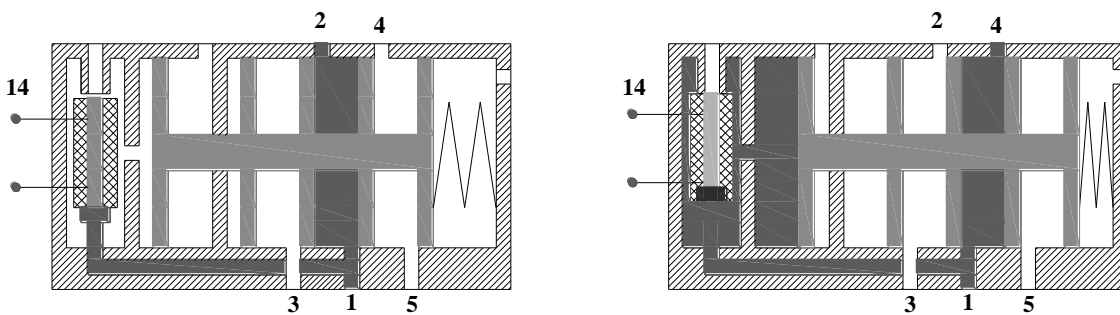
Cross sectional view of a 5/2 way solenoid operated valve
